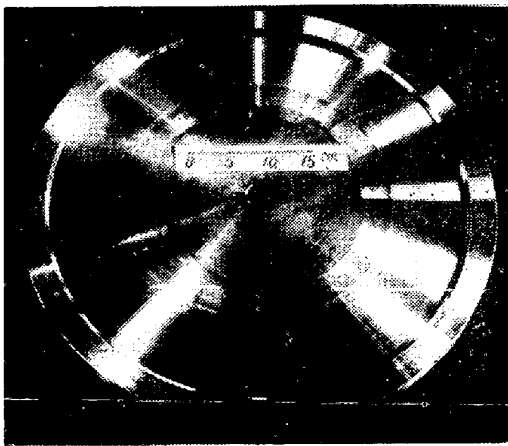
Composite wheel (sigma-welded) as shaped up.
